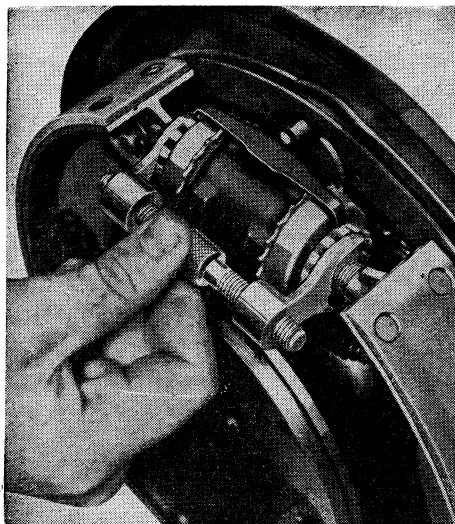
Type clamp to hold pistons in cylinders of Huck-Chevrolet brakes
